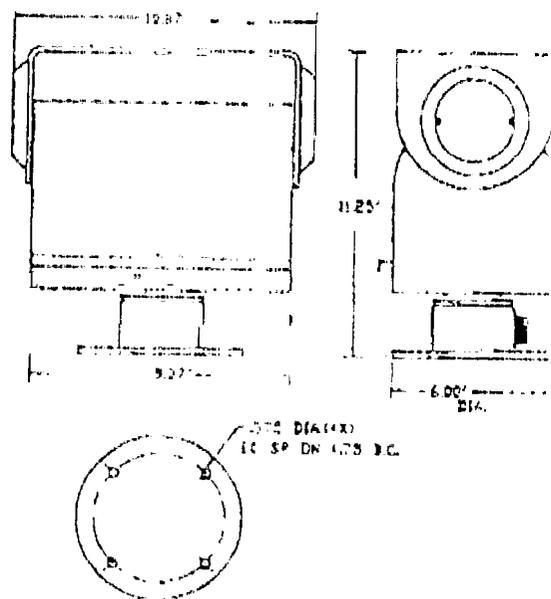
STAR Pan/Tilt Unit, Front, Side and Bottom Views
